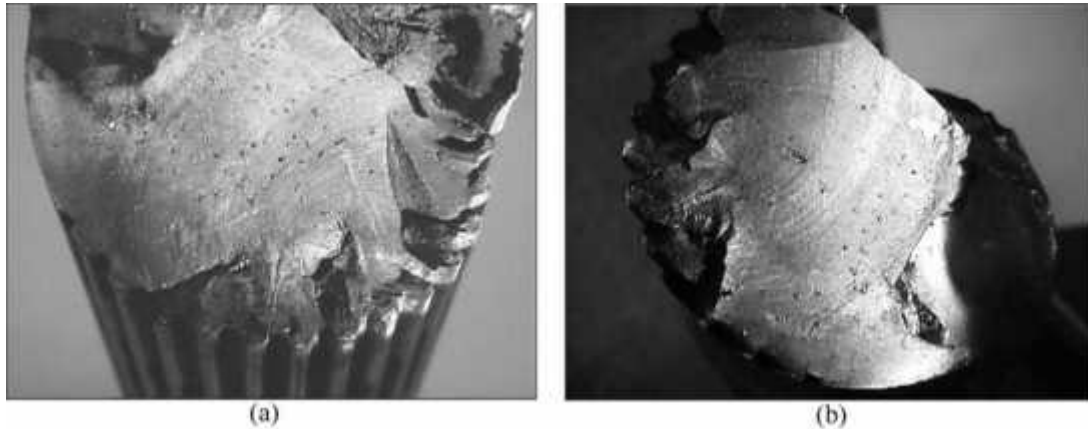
(a) and (b) Show the Fractured Surface of the Failed Propeller Shaft Macroscopically
